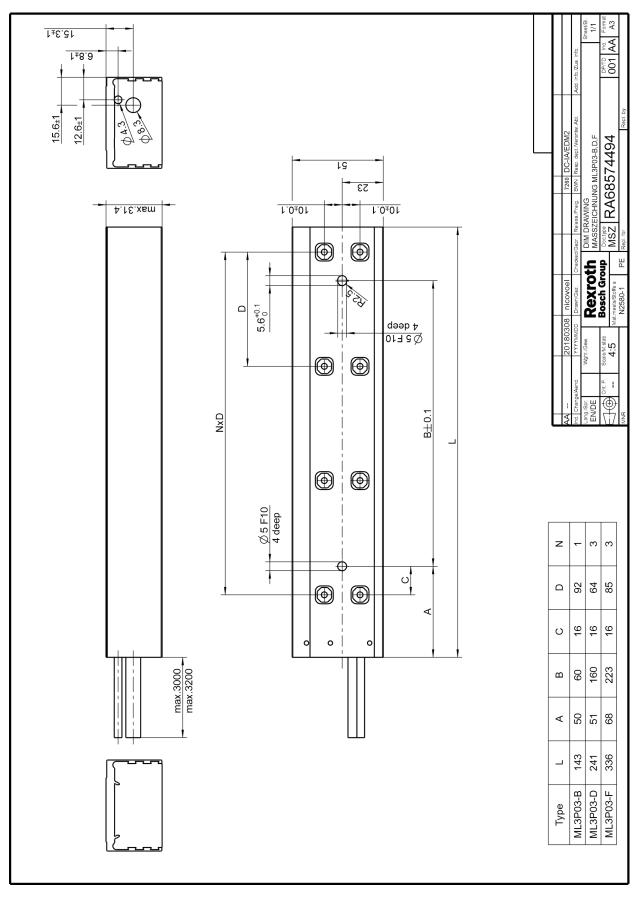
Dimension sheet primary part ML3P03-B/D/F
